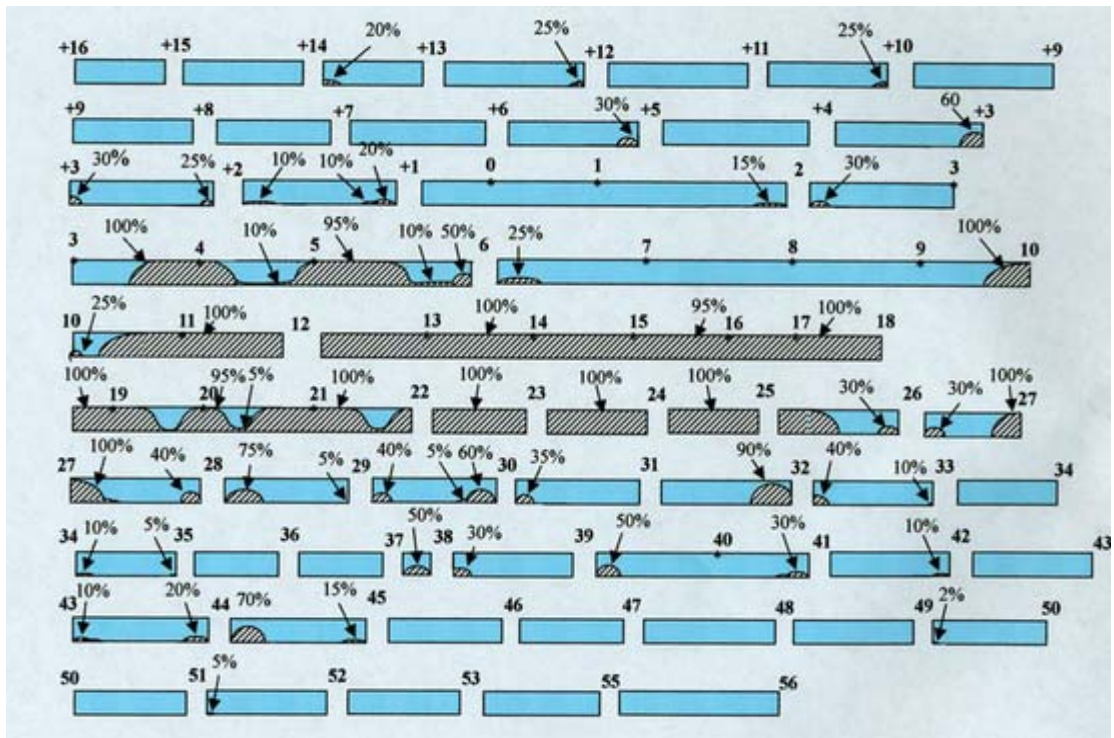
A drawing (not to scale) indicating the fatigue cracking on the skin fracture surface from rivets +16 through 56.
